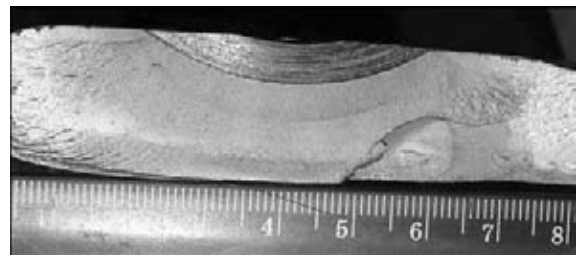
View of the surface of through-thickness fatigue crack (specimen 1)
